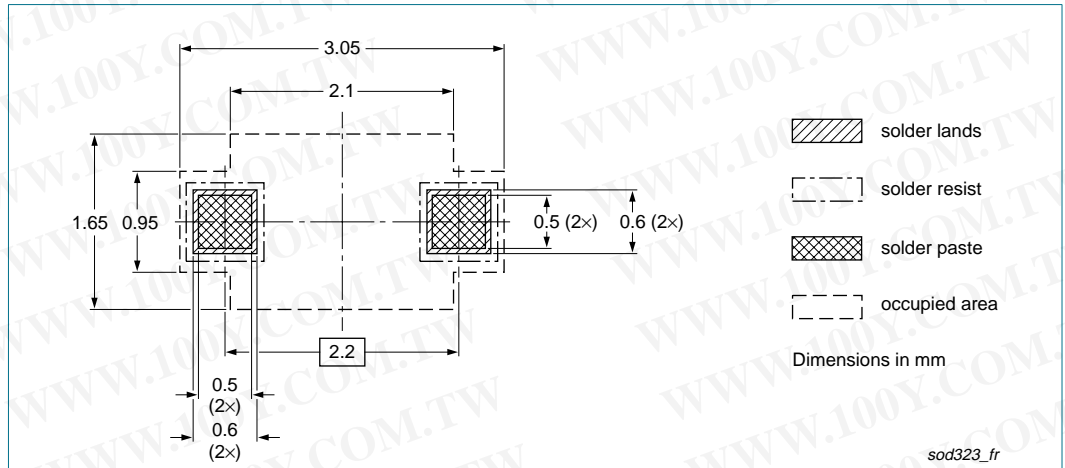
Reflow soldering footprint SOD323 (SC-76)
